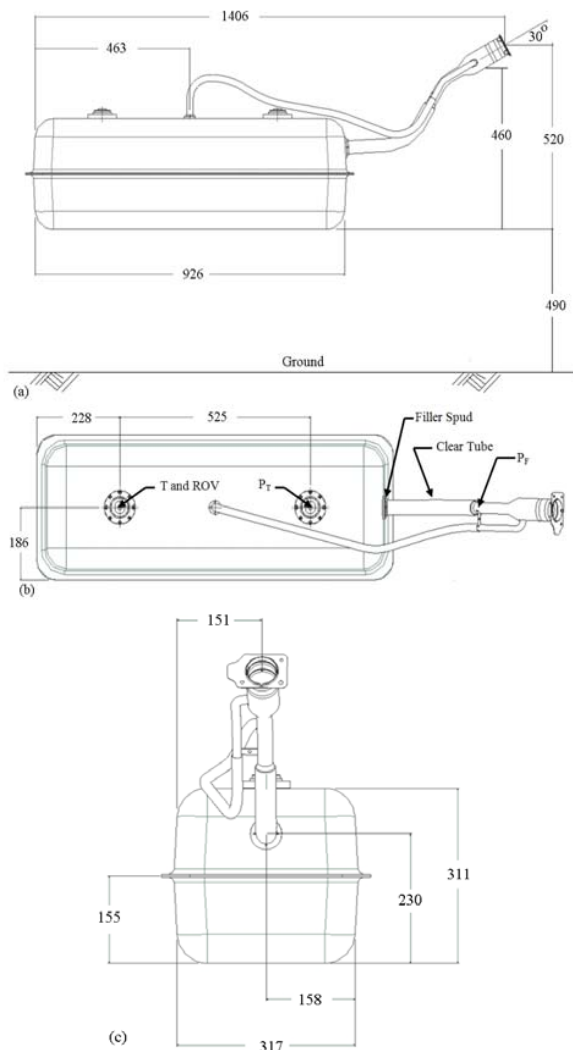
(a) Front view of the fuel tank system (b) Top view of the fuel tank system (c) Right side view of the fuel tank system. PF = filler pipe pressure location, PT = tank dome pressure location, T = temperature sensor and ROV = roll-over valve locations. All dimensions in mm
